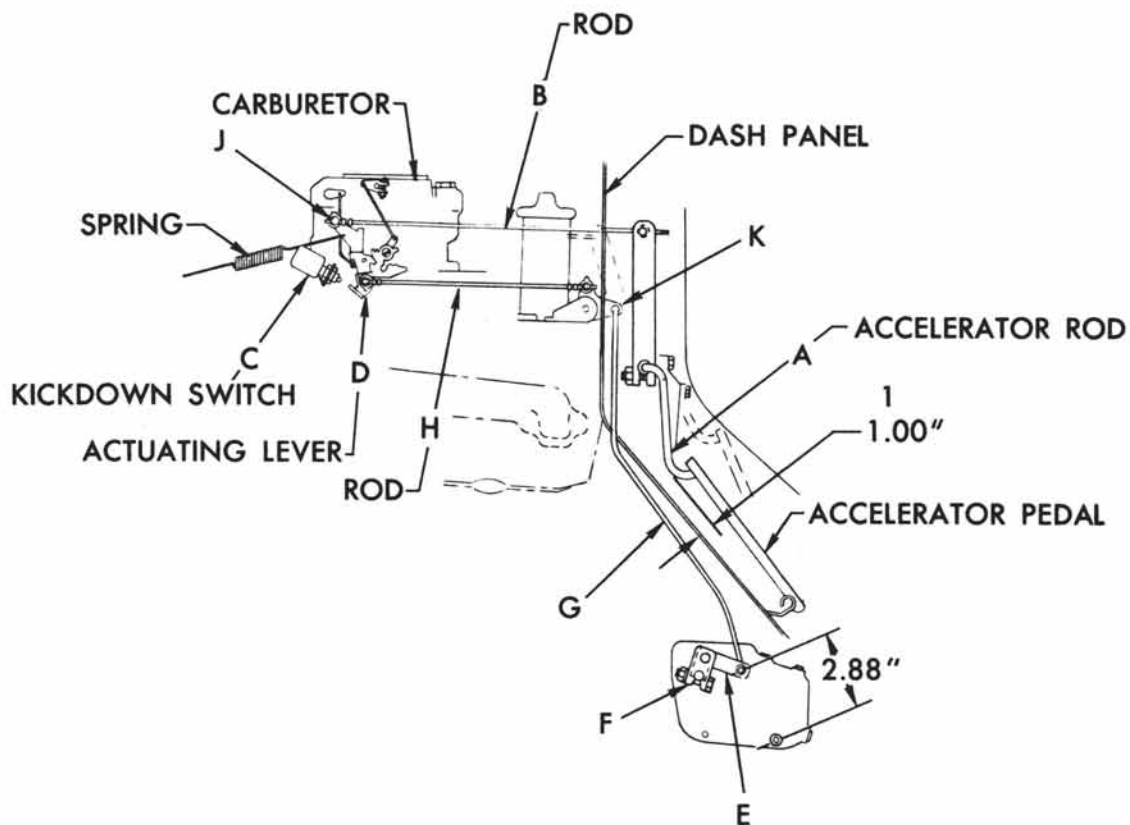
C Eight Cylinder - Power Package - Linkage Adjustment
